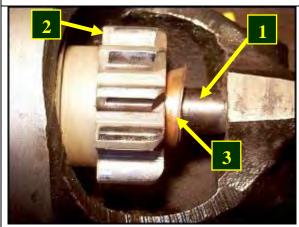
A. An overrun starter has three indicators: a discolored shaft (Ref. 1), wiping or polishing of the non-pressure side of the pinion teeth (Ref. 2), and a damaged thrust bearing (Ref. 3).
